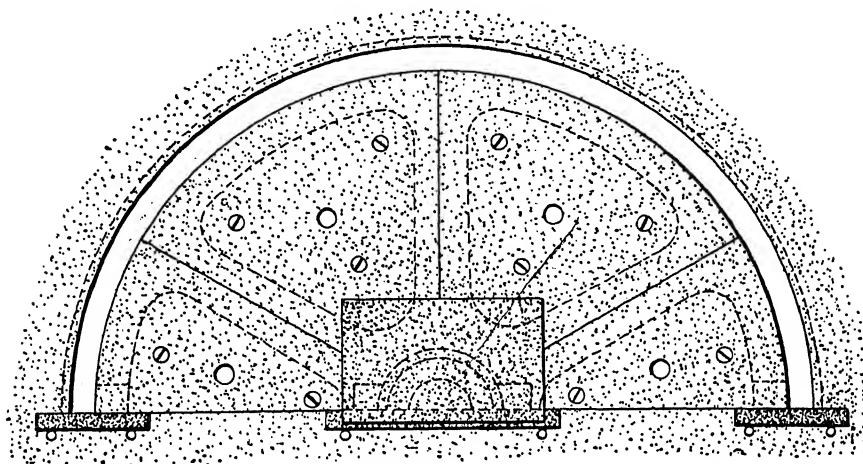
Half Fly-wheel Mould made without Pattern, using a Sweep Piece and Cores
